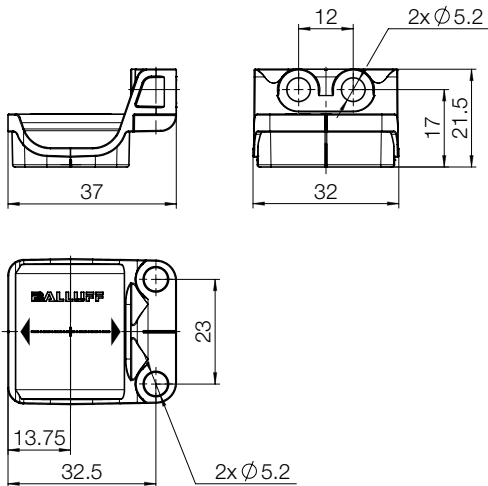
Installation dimensions of BAM TG-IR-036-A target, arrow shows the direction of travel (assembly see Fig. 5-3)
